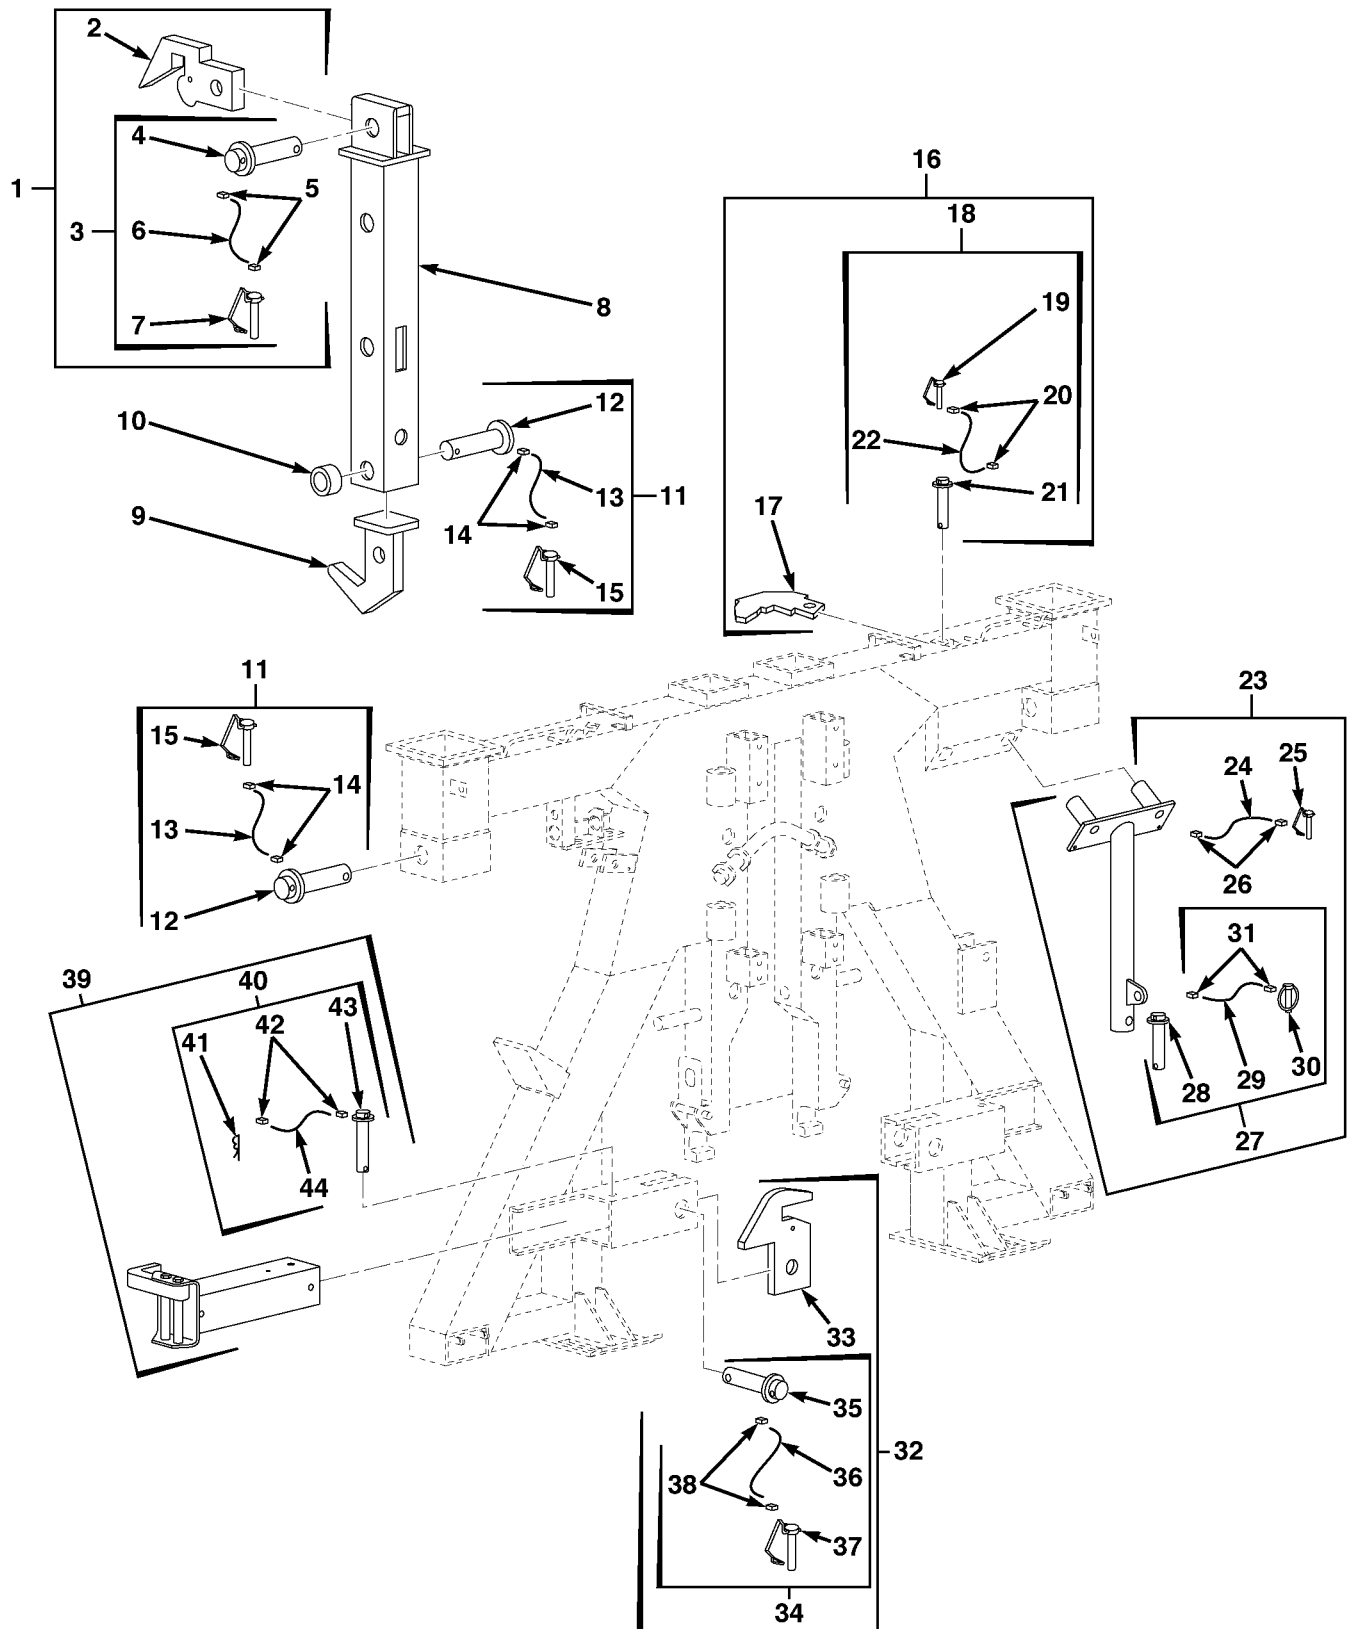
FRONT LIFTING ADAPTER (SHEET 1 OF 2)
